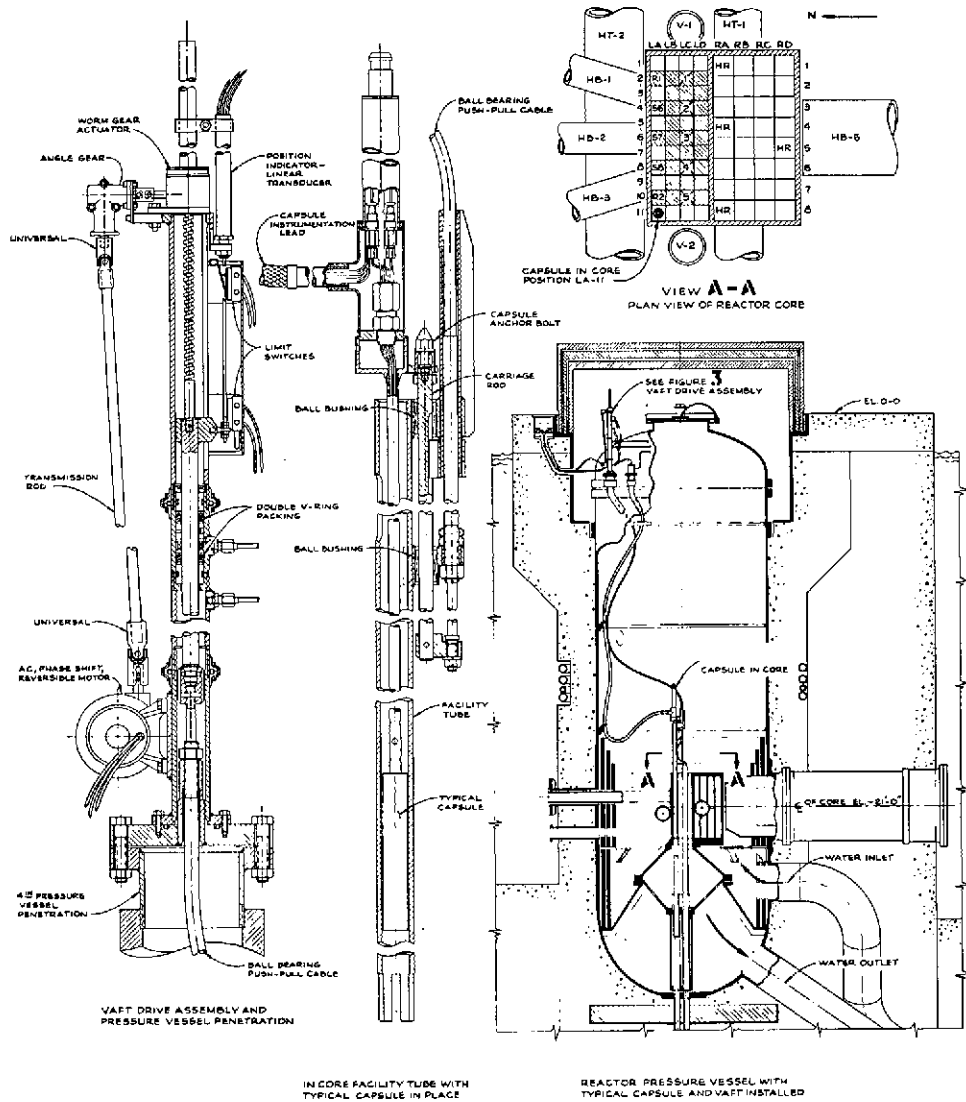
DRAWINGS OF THE CAPSULE POSITIONER EQUIPMENT
